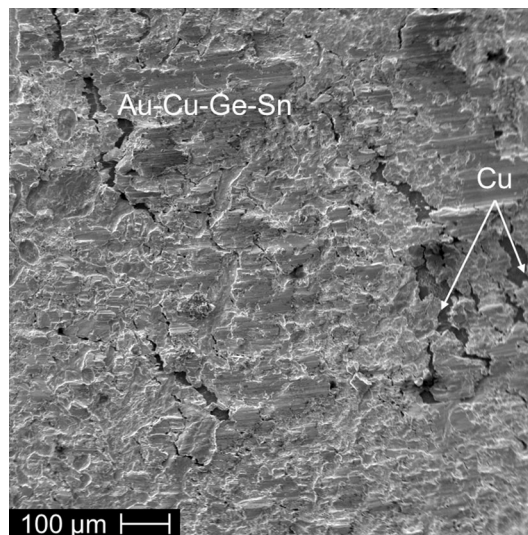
Fracture surface of a Cu/Au-13.7Ge-15.3Sn/Cu joint
